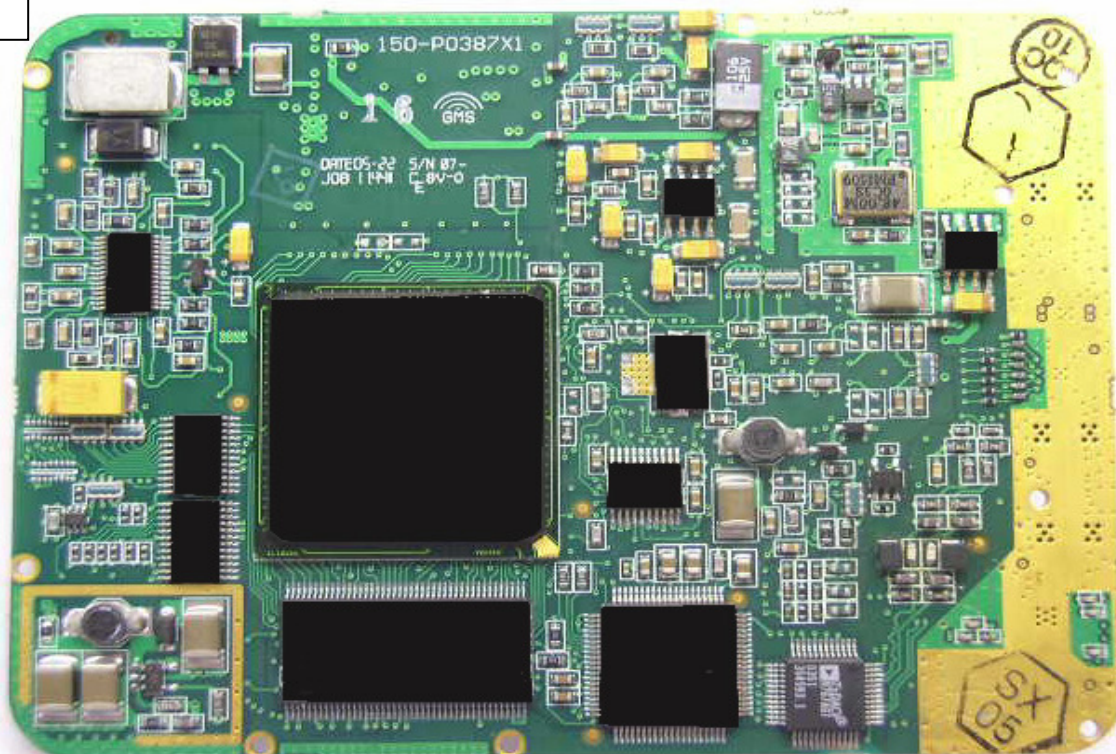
Interior bottom half (solder side) Tx Board assembly
